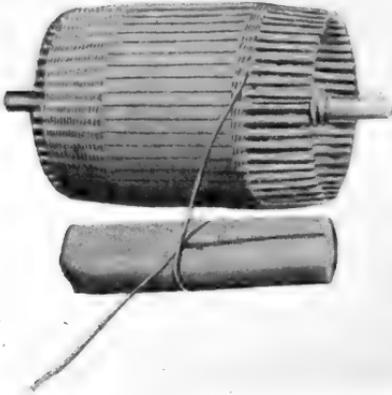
Winding Squirrel Cage Rotor. Allmänna Svenska Elektriska Aktiebolaget.
